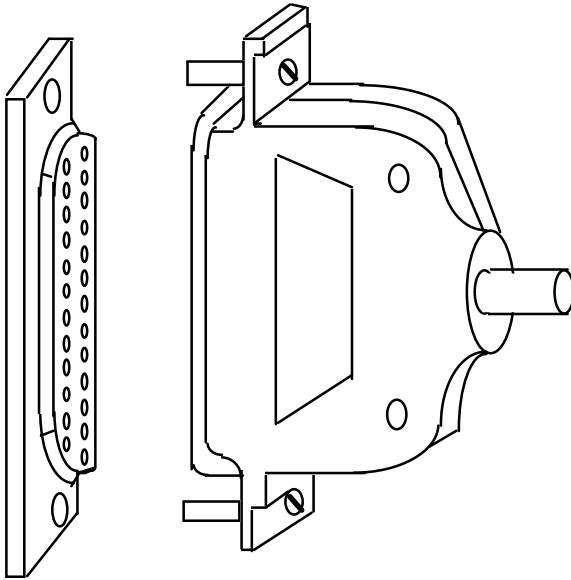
Typical Hooded Cable Grounding Arrangement
